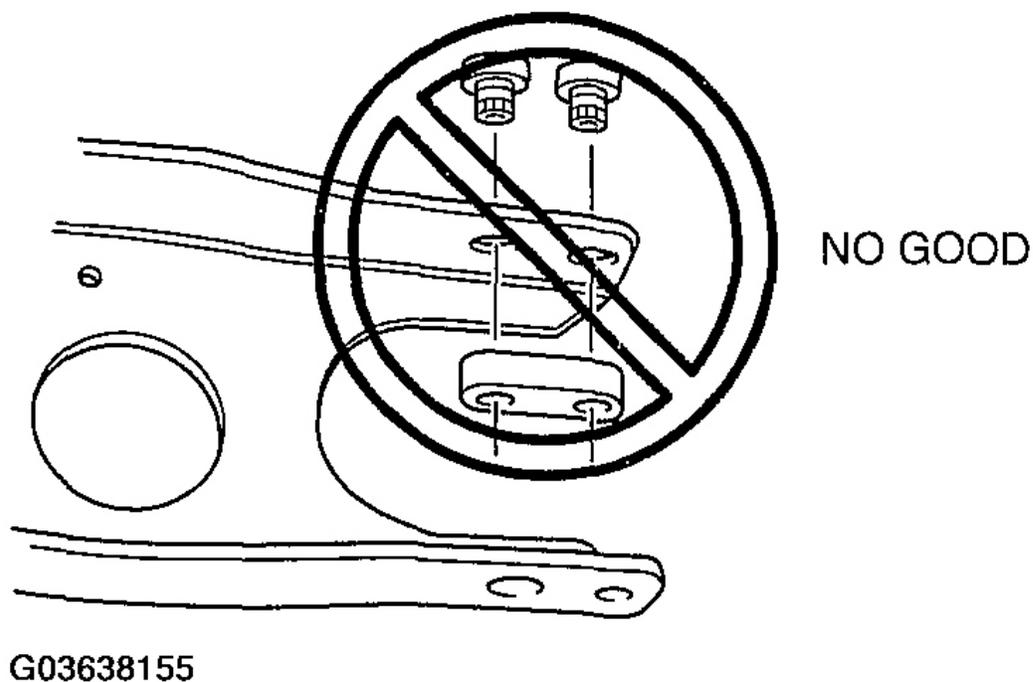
Removing Differential Mounting Spacer (2 Of 2)
